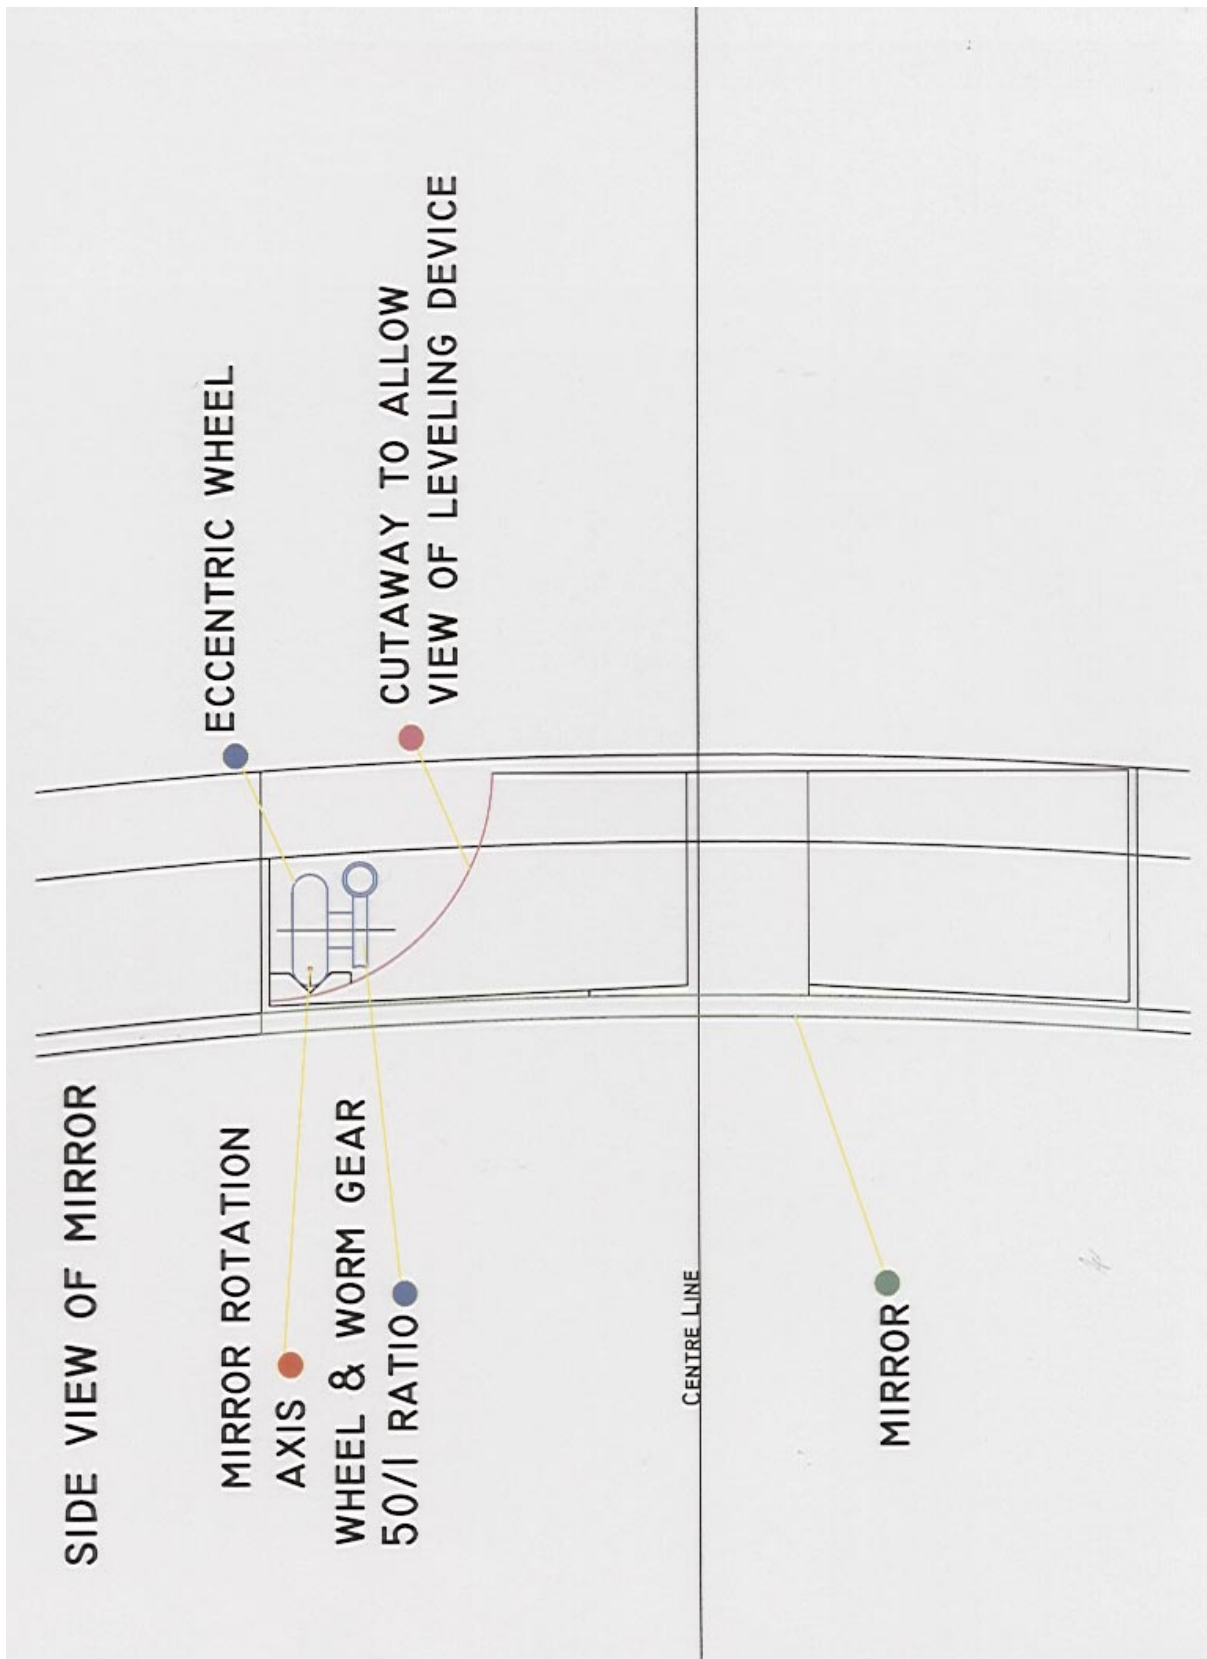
Side view of one of the mirrors showing the alignment mechanism.
